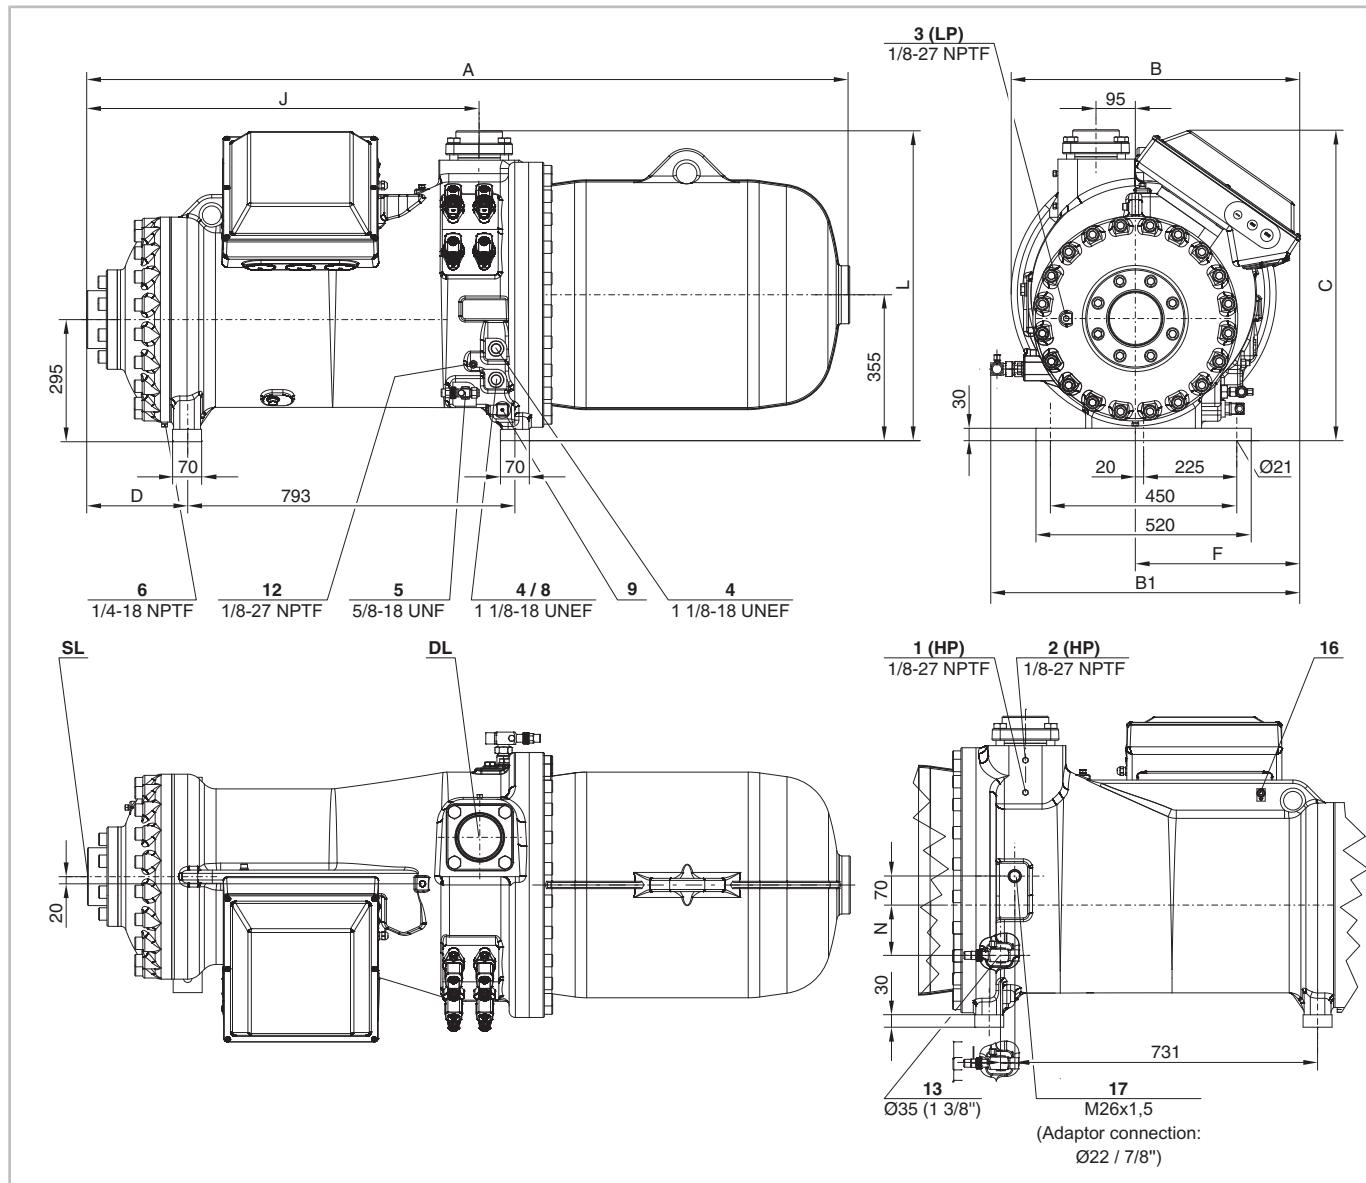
Dimensional drawing CSW9563-140Y .. CSW95113-320(Y)
